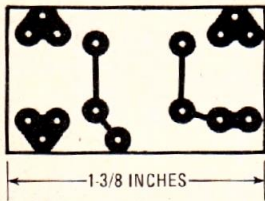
WHEN YOU MAKE THIS BOARD, be sure that pads *do not touch* rectangular border.
